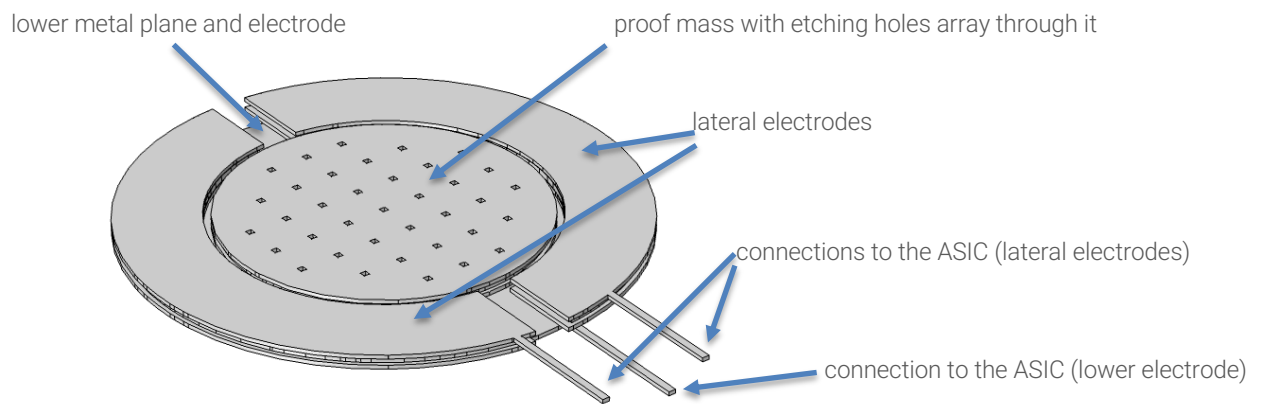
3D CAD drawing of the metal layers without transparency. M1, M2, V2 and M3.
